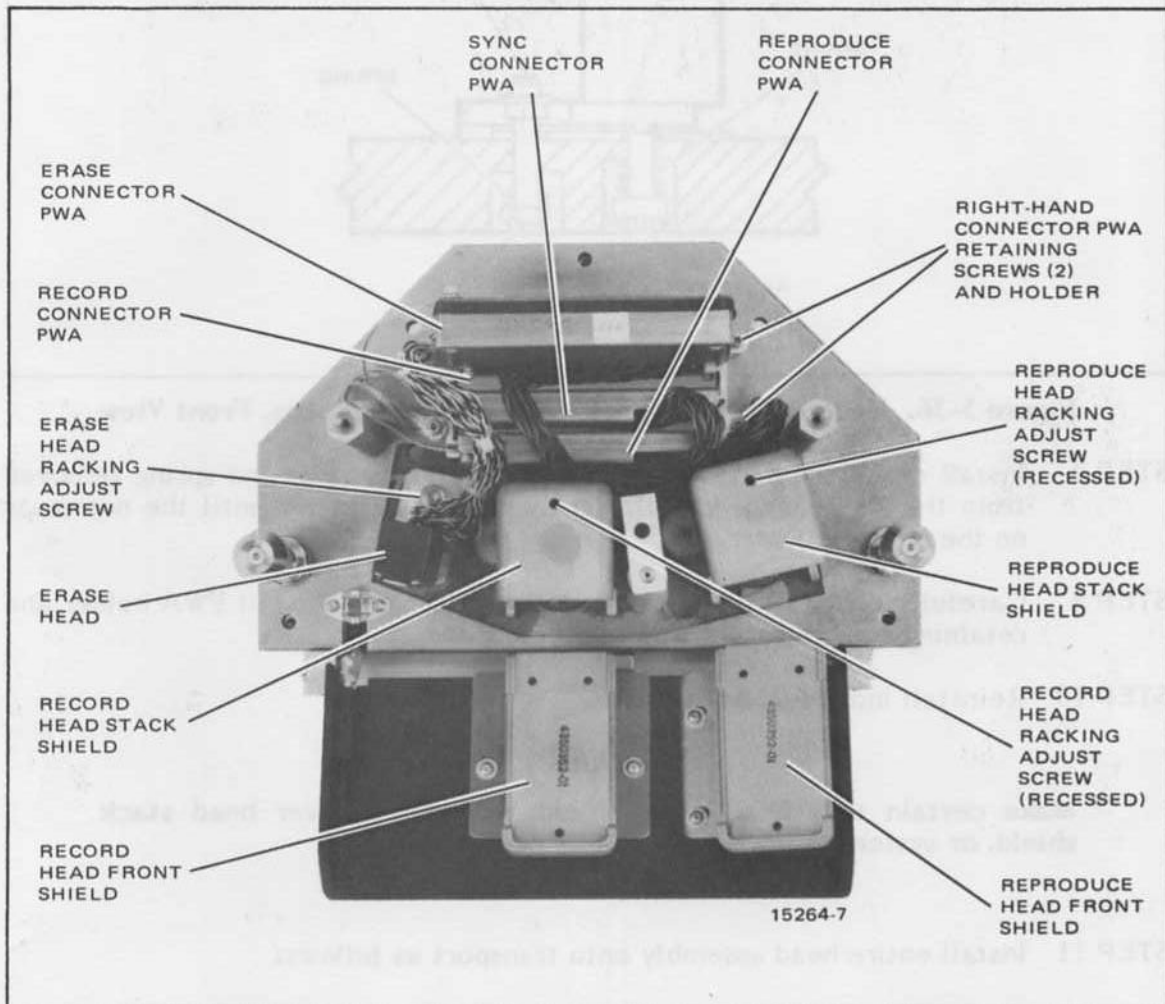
Top View of Head Assembly With Main Head Shield Removed
